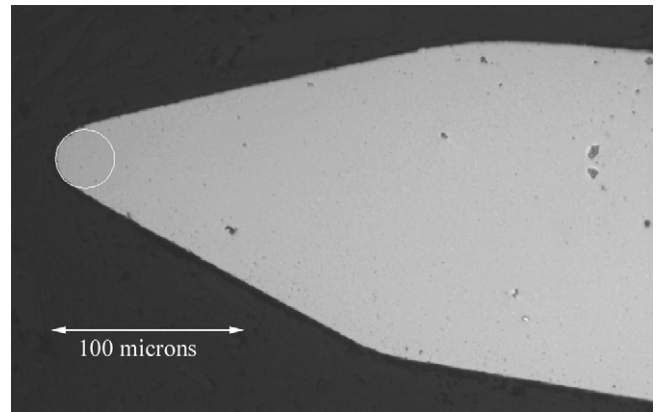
Tip radius measurement. 1086 blade, 60 cuts, type I edge.
